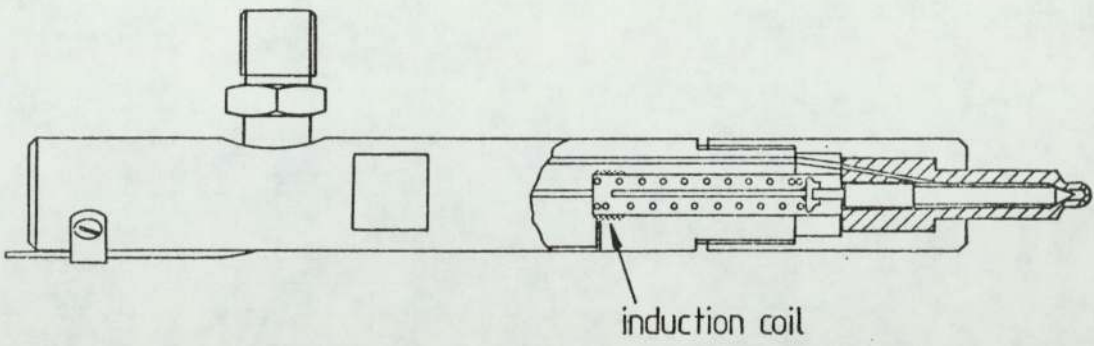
, Section through a low spring injector instrumented for needle lift measurement, showing the location of the induction coil.
